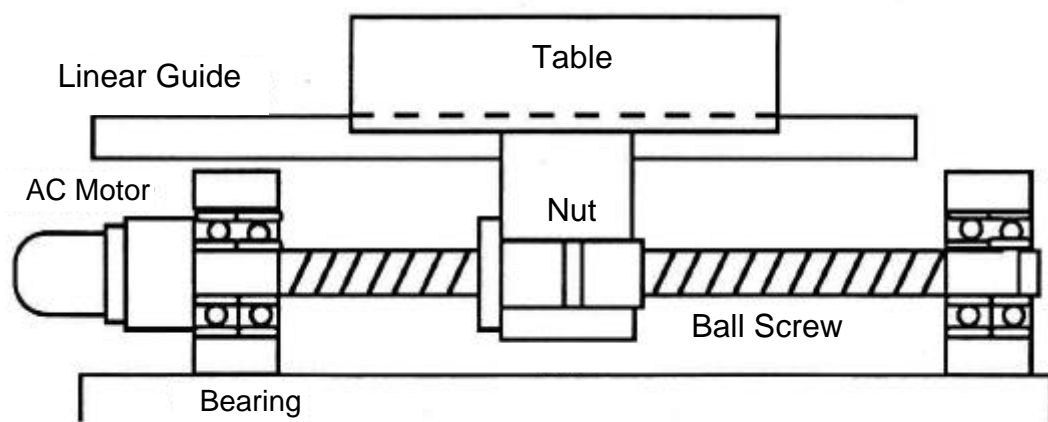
Drive Train Elements for a Single Axis of the Machine Tool X-Y Table (Tung, 1993).
